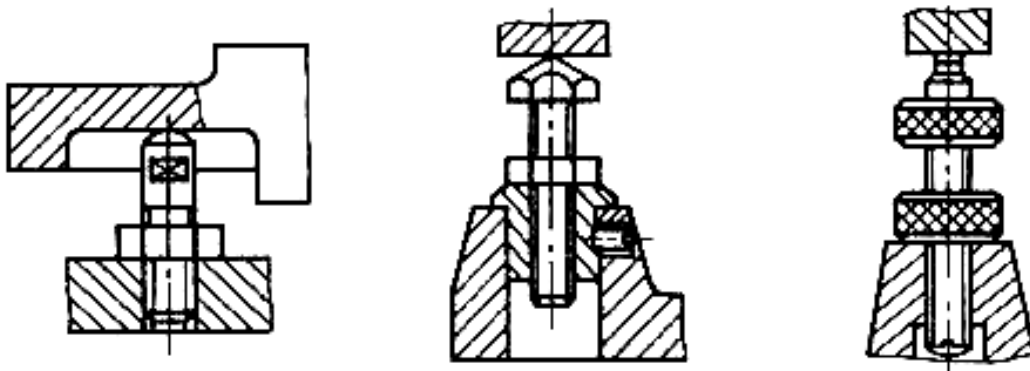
Examples of workpiece mounting on adjustable rests
